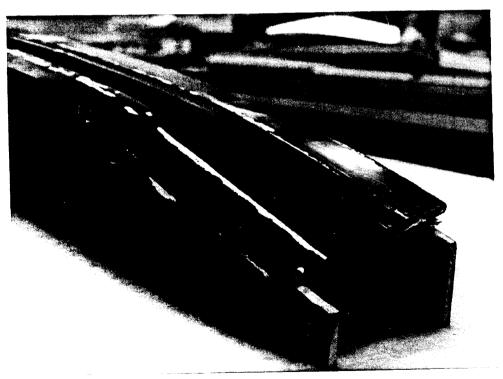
Closeup of postforming tool aft end incorporating twist.
